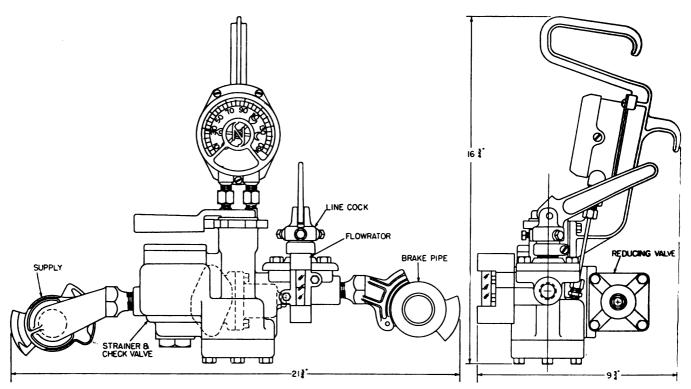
Single car testing device with a flowrator and special reducing valves incorporated.
